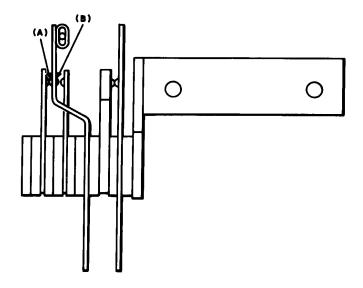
Rotary Interrupter Spring Assembly with Offset Spring
